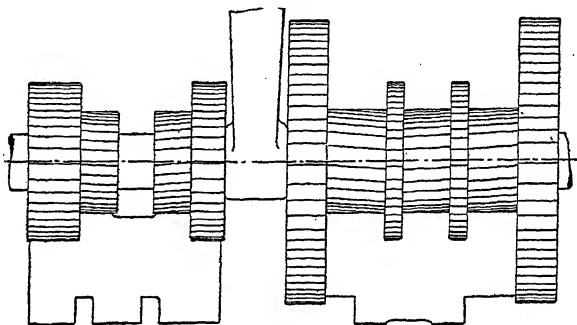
Maintaining work flow by performing all cuts on the piece on one machine.
